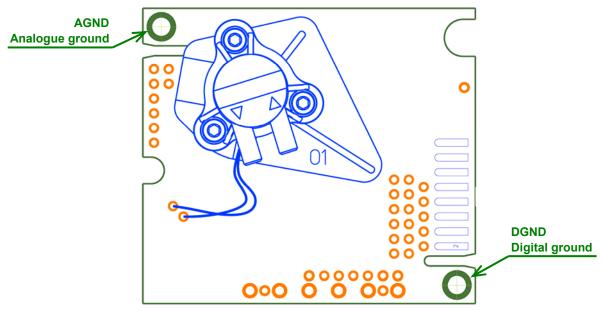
CO₂Engine[™] ICB ground / shield attachment
